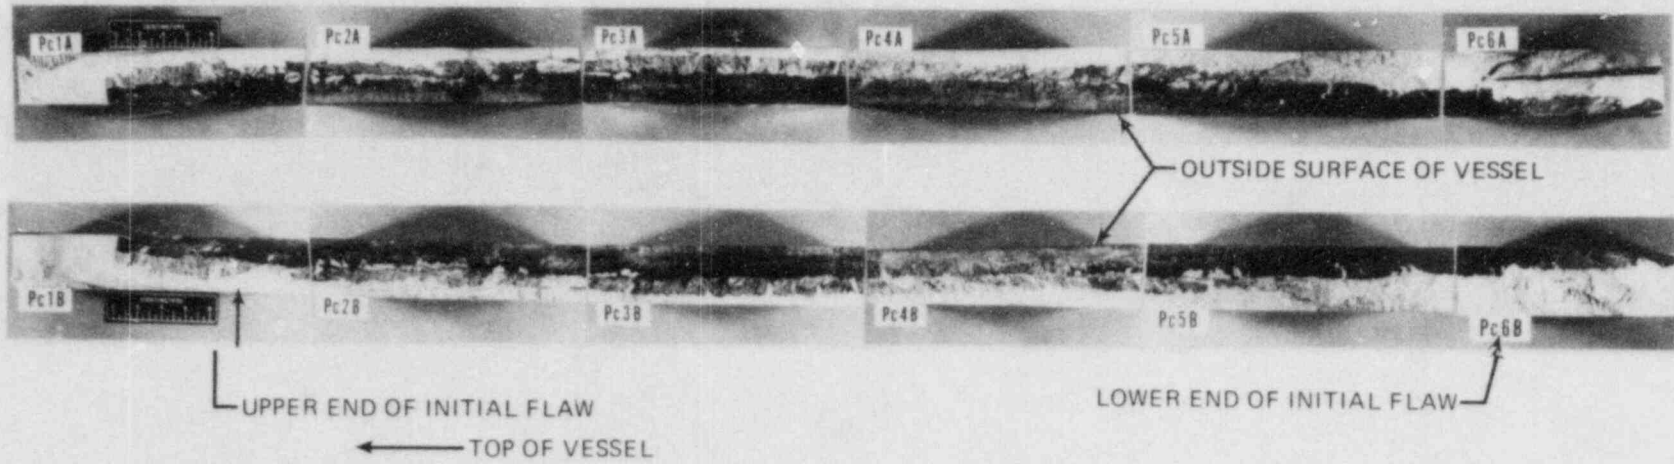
Montage of fracture surface from PTSE-1. Only branch 1 surfaces are shown in pieces 6A and 6B. (See Fig. 10.3 for key to location.)
